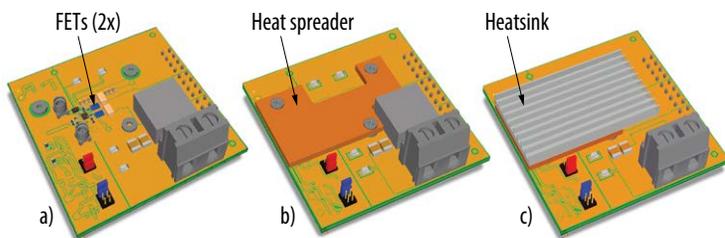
PCBs with a) no back-side cooling, b) with a connected Copper heat spreader, and c) with an Aluminum heatsink. Note: The heat spreader and heatsink can be combined or independent and heat flux still flows into PCB.
